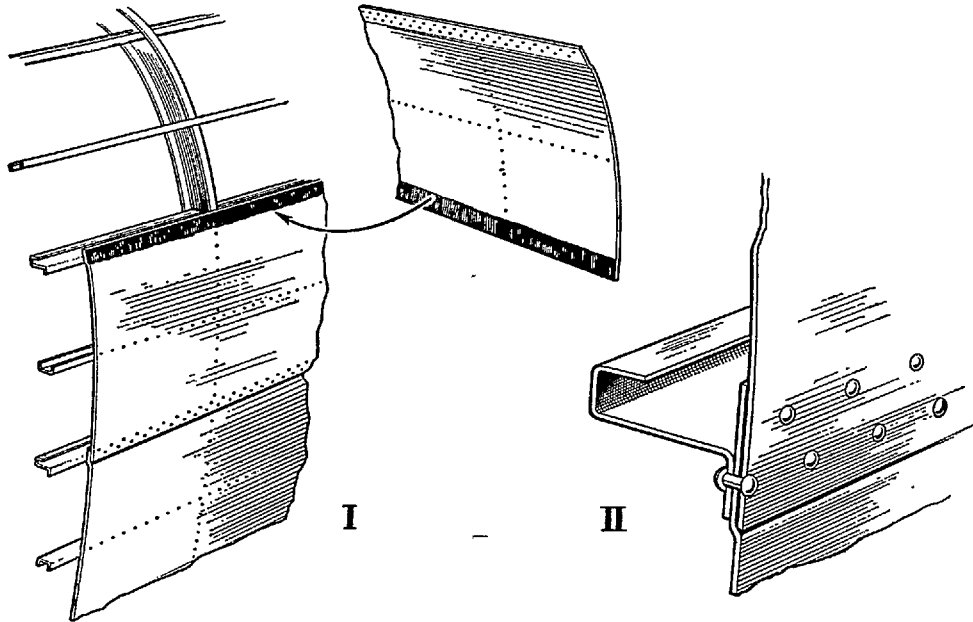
Weatherproofing riveted joints by Bostik cement No. 321
